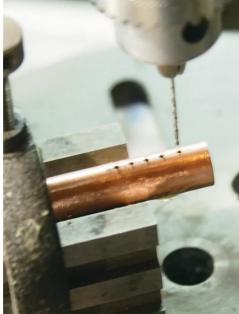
The spray bar is just a length of copper pipe with a brass plug soldered into the end.
